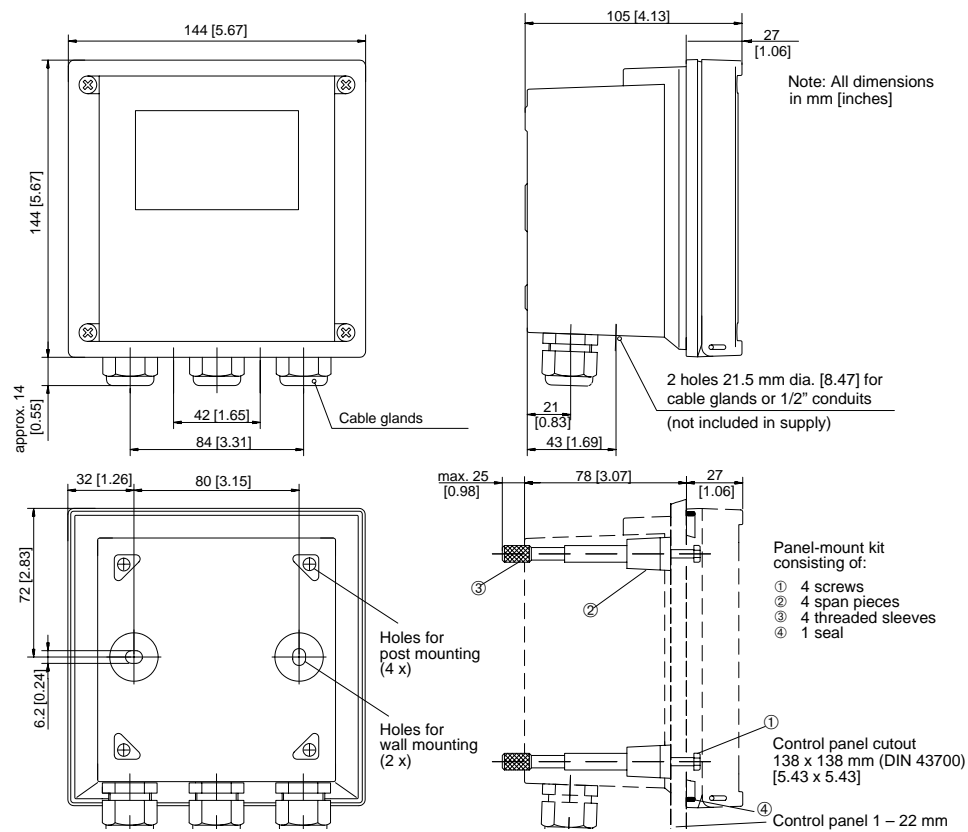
Dimension drawing for DULCOMETER® 2401 CondI, mounting diagram and panel-mount kit (Order No. 1008708)
